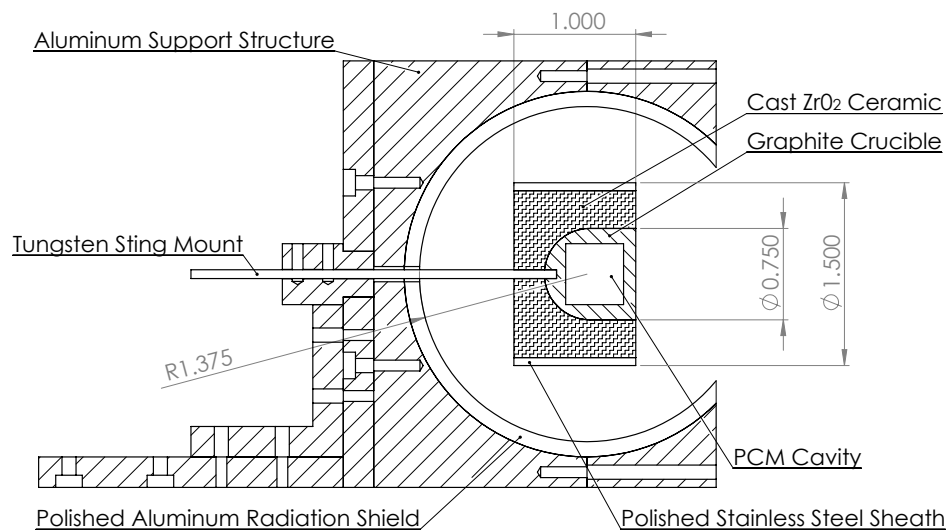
2D schematic of the test section and support structure with additional cast ceramic and stainless steel insulation. Dimensions are shown in inches.
